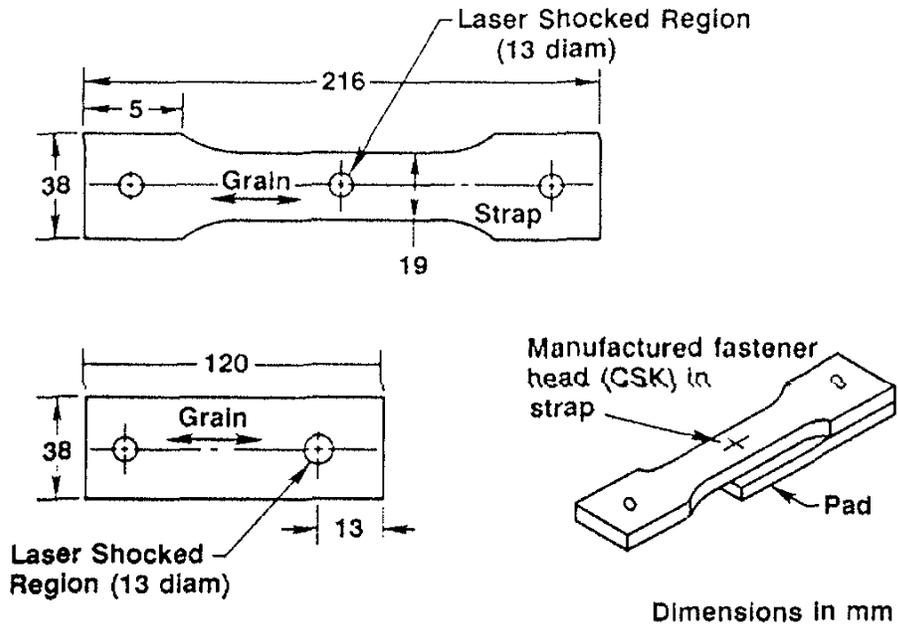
Specimen Configuration for the Fastened, Fretting Fatigue Specimen. All Dimensions are in Millimeters
